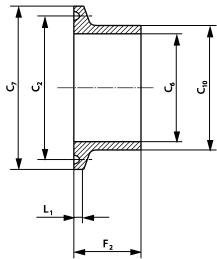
Sectional drawing of a clamp fitting acc. to ISO 2852 - DO
